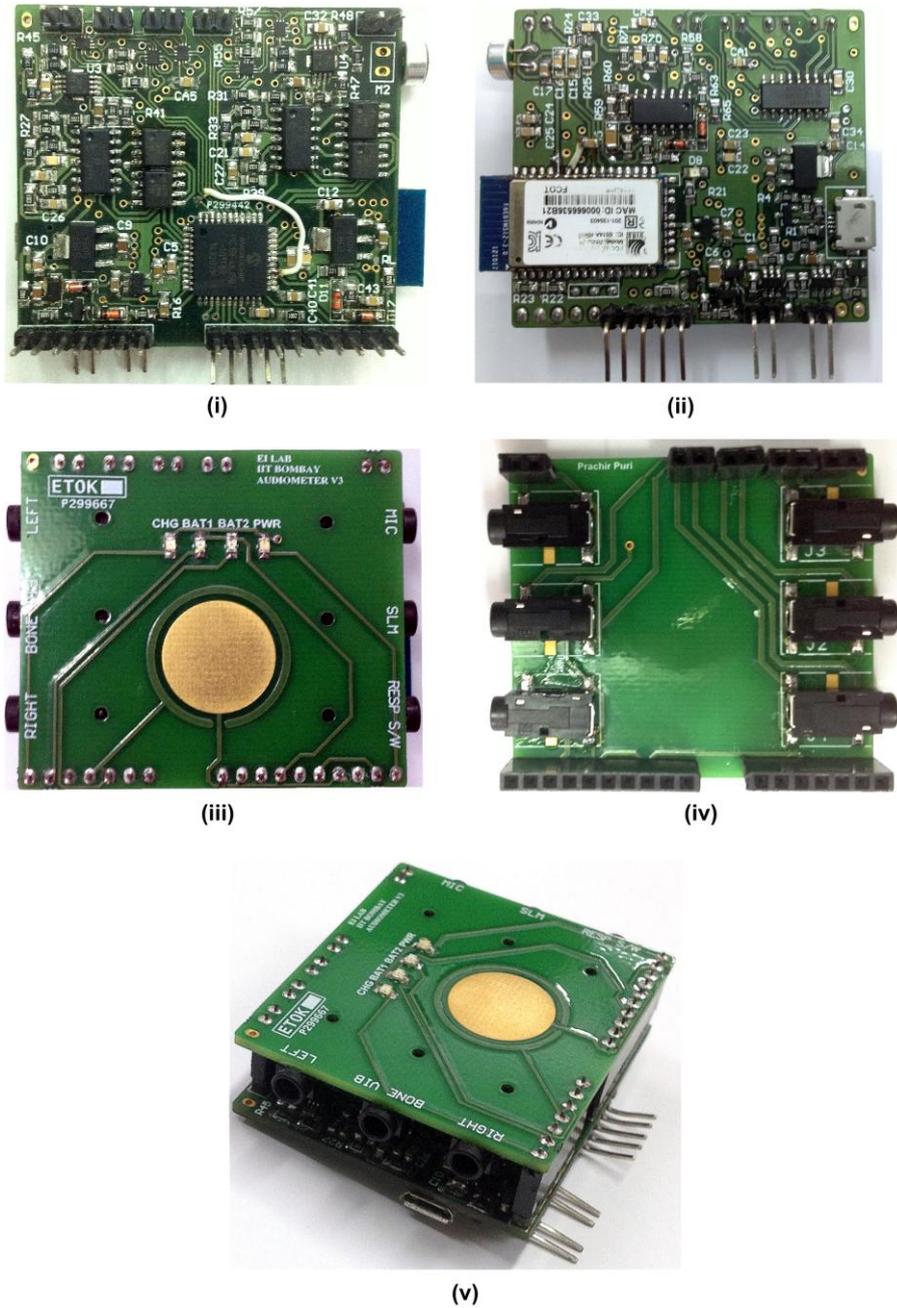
(i) Top view of the 4-layer assembled PCB, (ii) bottom view of the 4-layer assembled PCB, (iii) top view of the 2-layer assembled PCB, (iv) bottom view of the 2-layer assembled PCB, and (v) isometric view of the audiometry module after stacking the 4-layer and the 2-layer PCBs.
